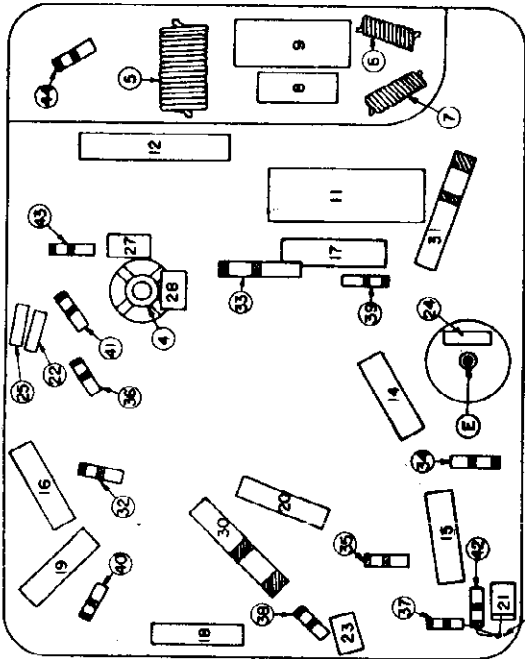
PARTS LAYOUT--DASH UNIT--Bottom View
